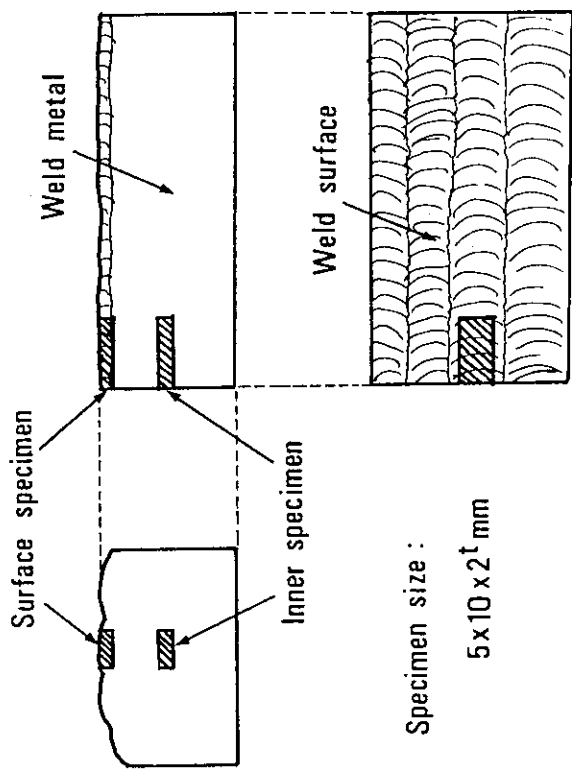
Locations in weld metal where specimens were cut out
